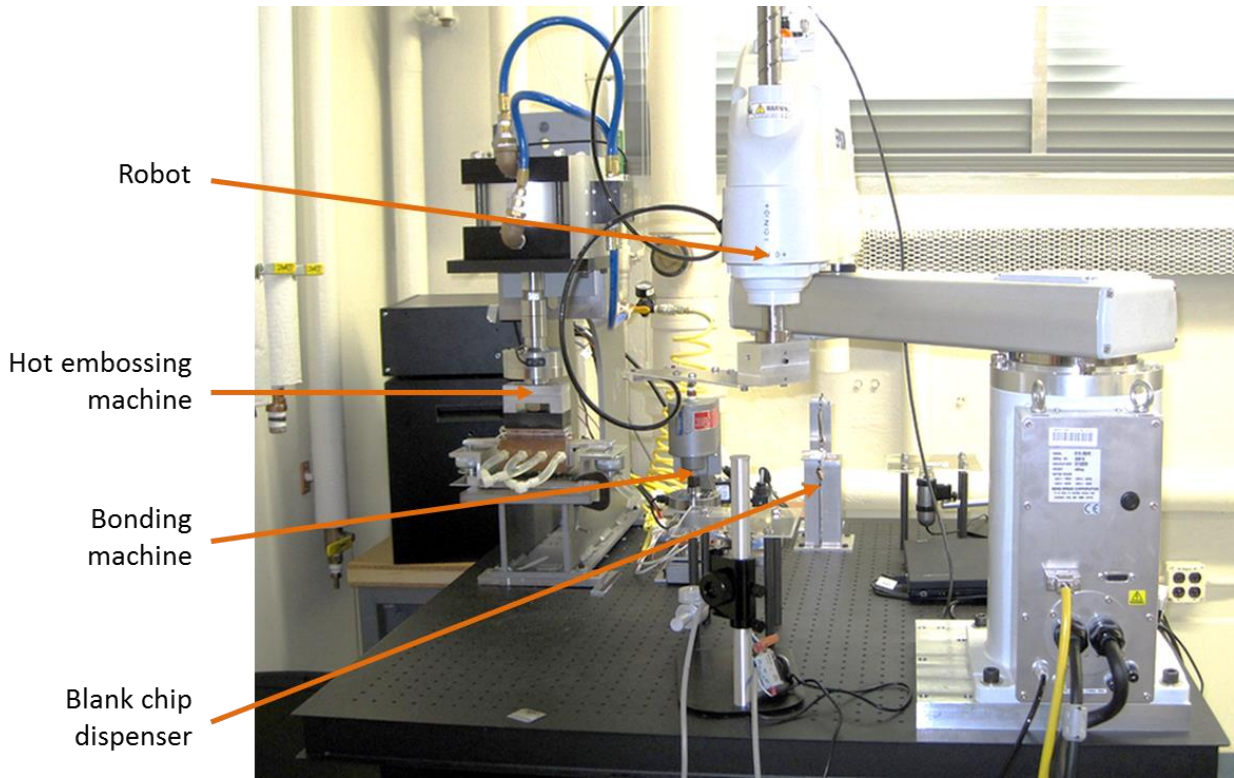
The first version of the microfactory. A previous version of the hot embossing machine is on the left. A robot arm for material handling is on the right. Previous versions of a bonding machine and dispenser for blank chips are located in the center [31].
